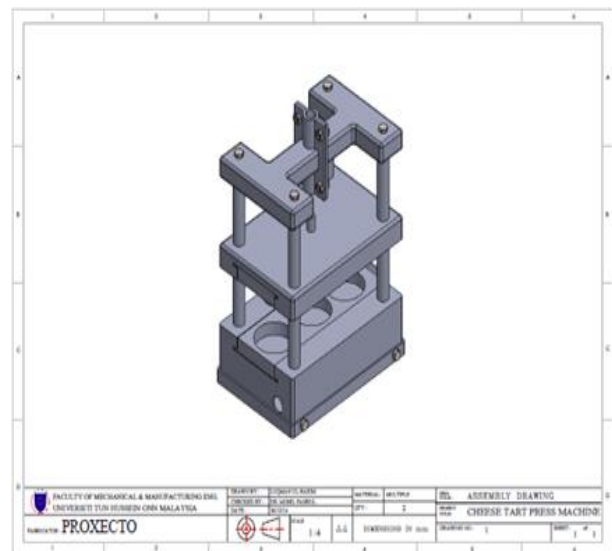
Assembly drawing of Cheese Tart Press Machine
